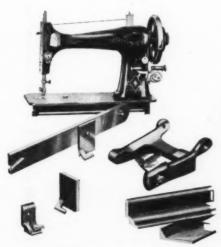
Sewing machine feed dog is another part that is drawn cold
